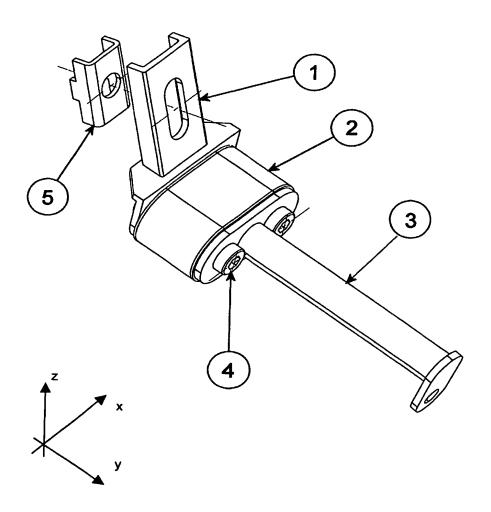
Training wheel linkage assembly (wheel omitted for clarity) - perspective view
